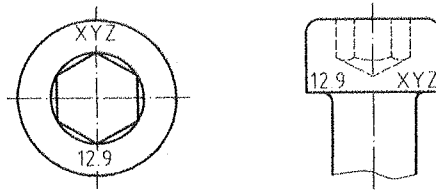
Examples of marking on hexagon socket head cap screws
